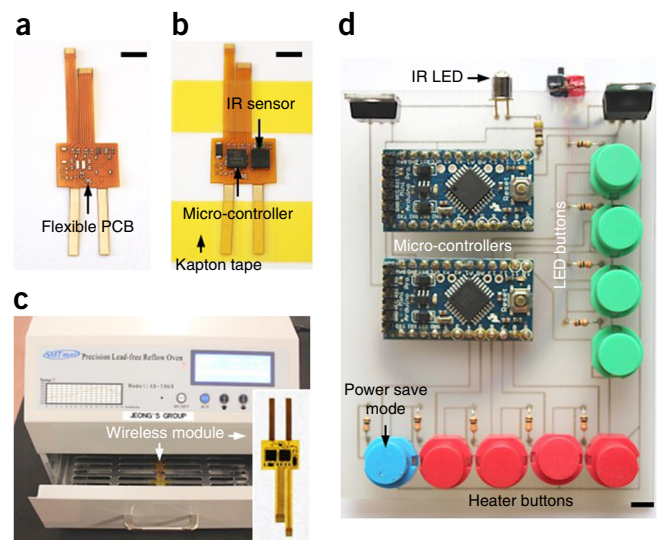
| Preparation of IR wireless control modules. (a) Photograph of a flexible PCB for the wireless receiver before mounting the chips. (b) Put solder paste on the electrodes and mount the electronic components, including a microcontroller and an IR sensor. (c) Cure solder paste in the reflow oven to complete the wireless receiver. The inset shows a completed wireless receiver. (d) Photograph of a wireless remote controller that sends commands to the wireless receiver when buttons are pressed. Scale bars, 5 mm.
